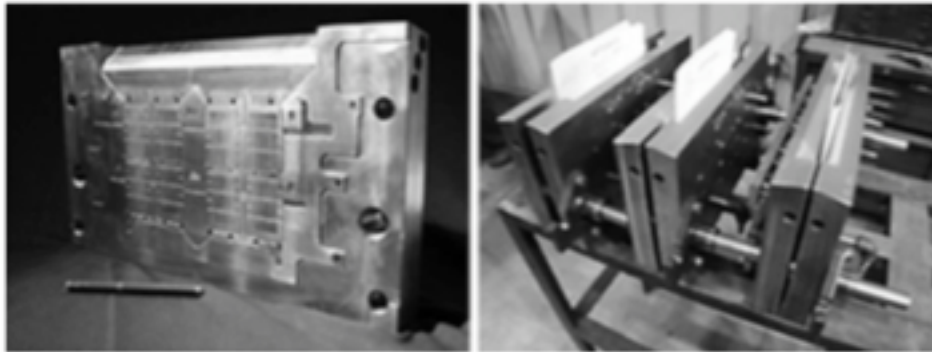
Battery grid casting mold (book mold). (From Wirtz Manufacturing. Available at <http://www.wirtzusa.com>.)
